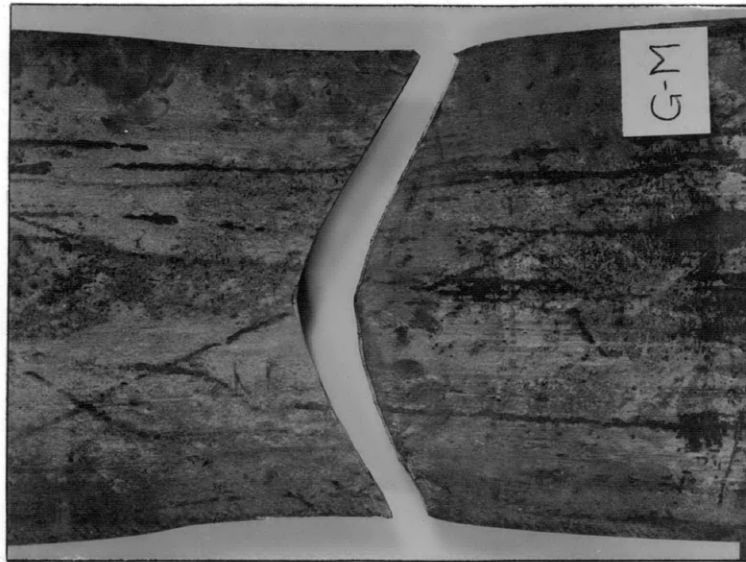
Fracture in Medium Steel Control Specimen G-M
